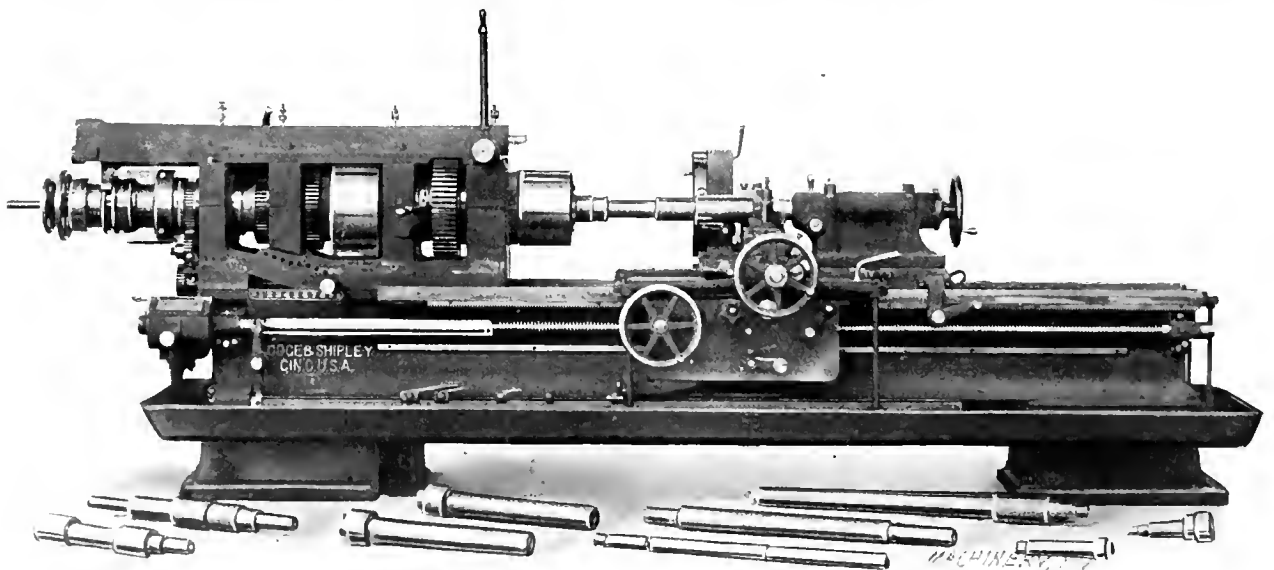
The 4 by 48-inch Marvel Lathe with Gear Covers Removed, showing Head-stock Arrangement
